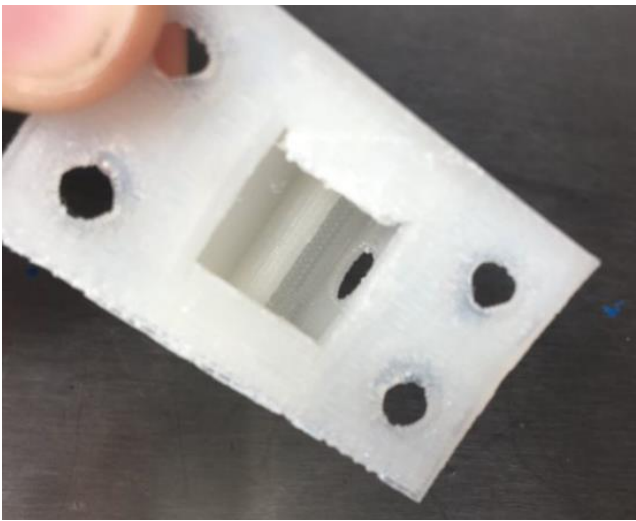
Back side of camera mount. Small shelf to hold camera into place.
